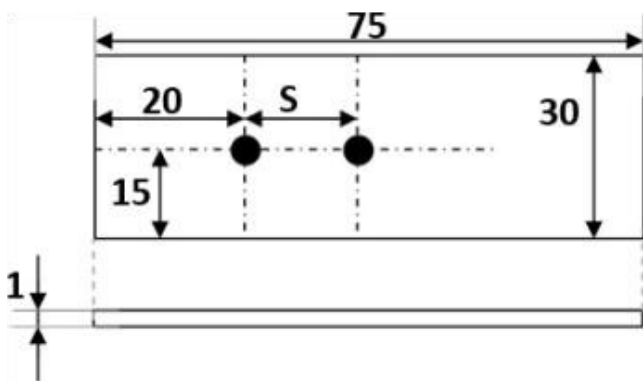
Dimensions of samples and welding layout for design of experiment (Dimensions in mm)
